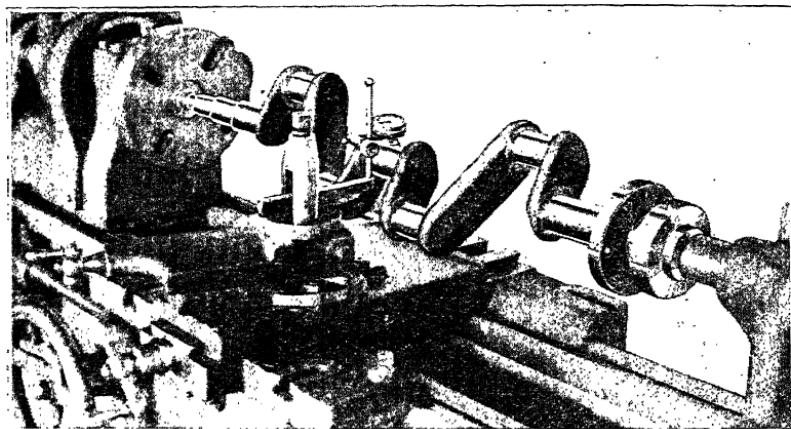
Testing a Crankshaft in the Lathe with a Dial Test Indicator
